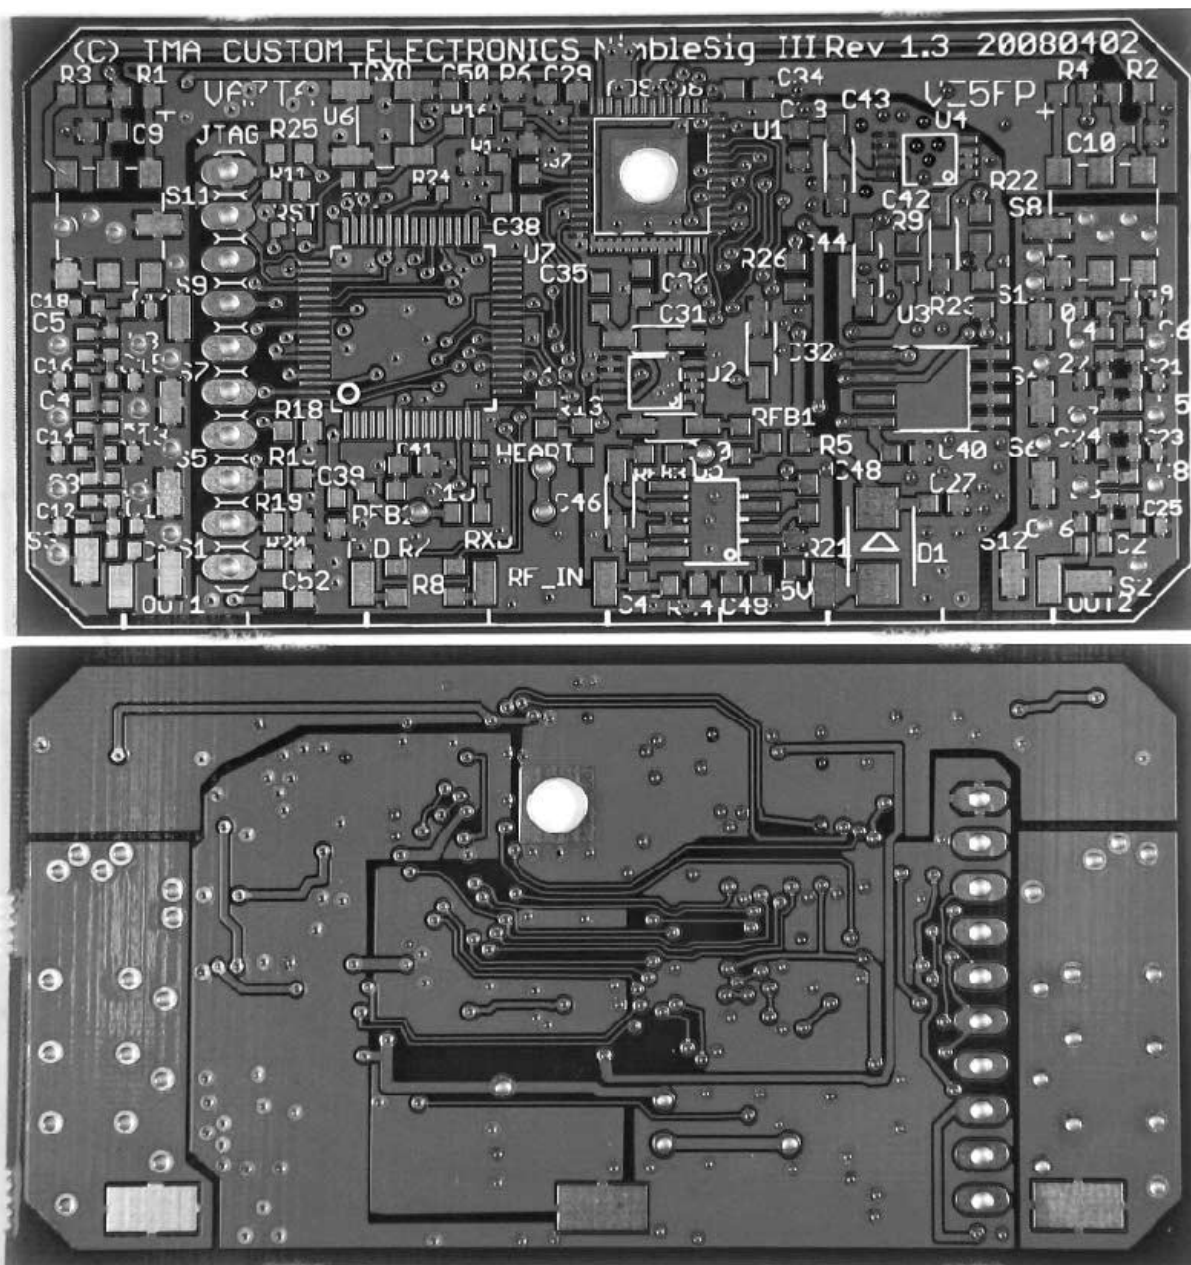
The component side of the circuit board is shown in Part A. Part B shows the bottom of the circuit board.
